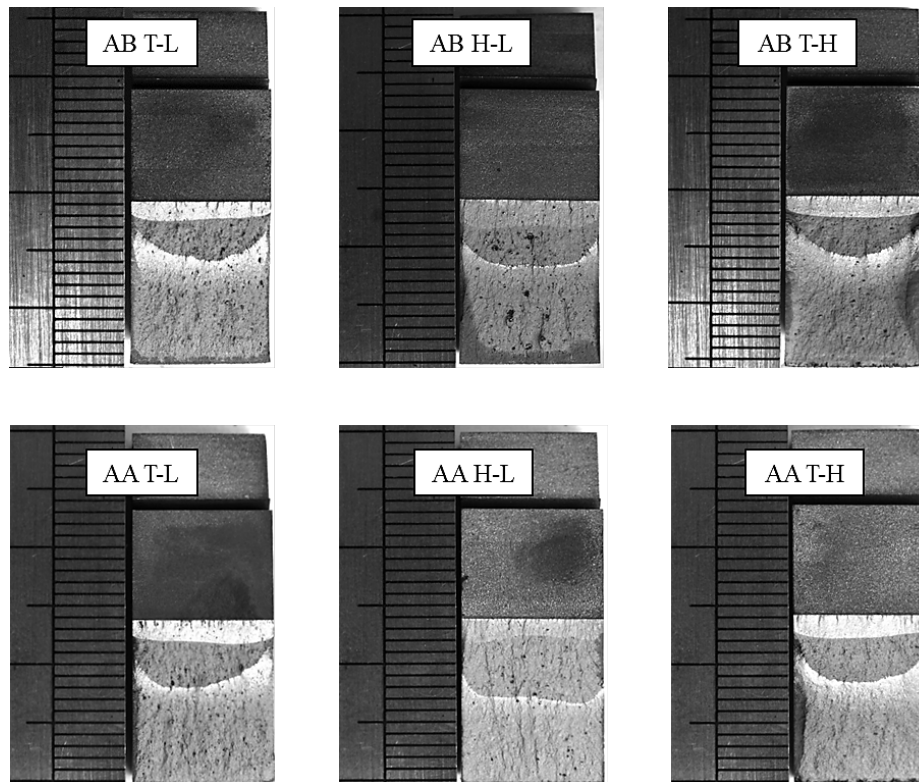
Fracture surfaces of T-L, H-L and T-H C(T) specimens in the AB and AA conditions (left scale minor division: 1 mm).
